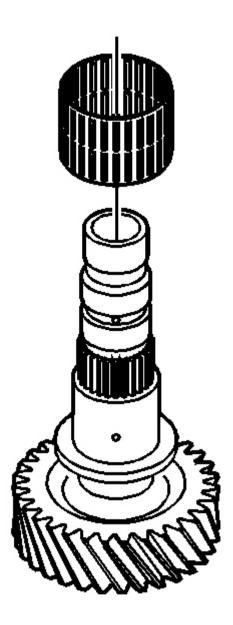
Caged Needle Bearings & Intermediate Shaft Courtesy of GENERAL MOTORS CORP.
